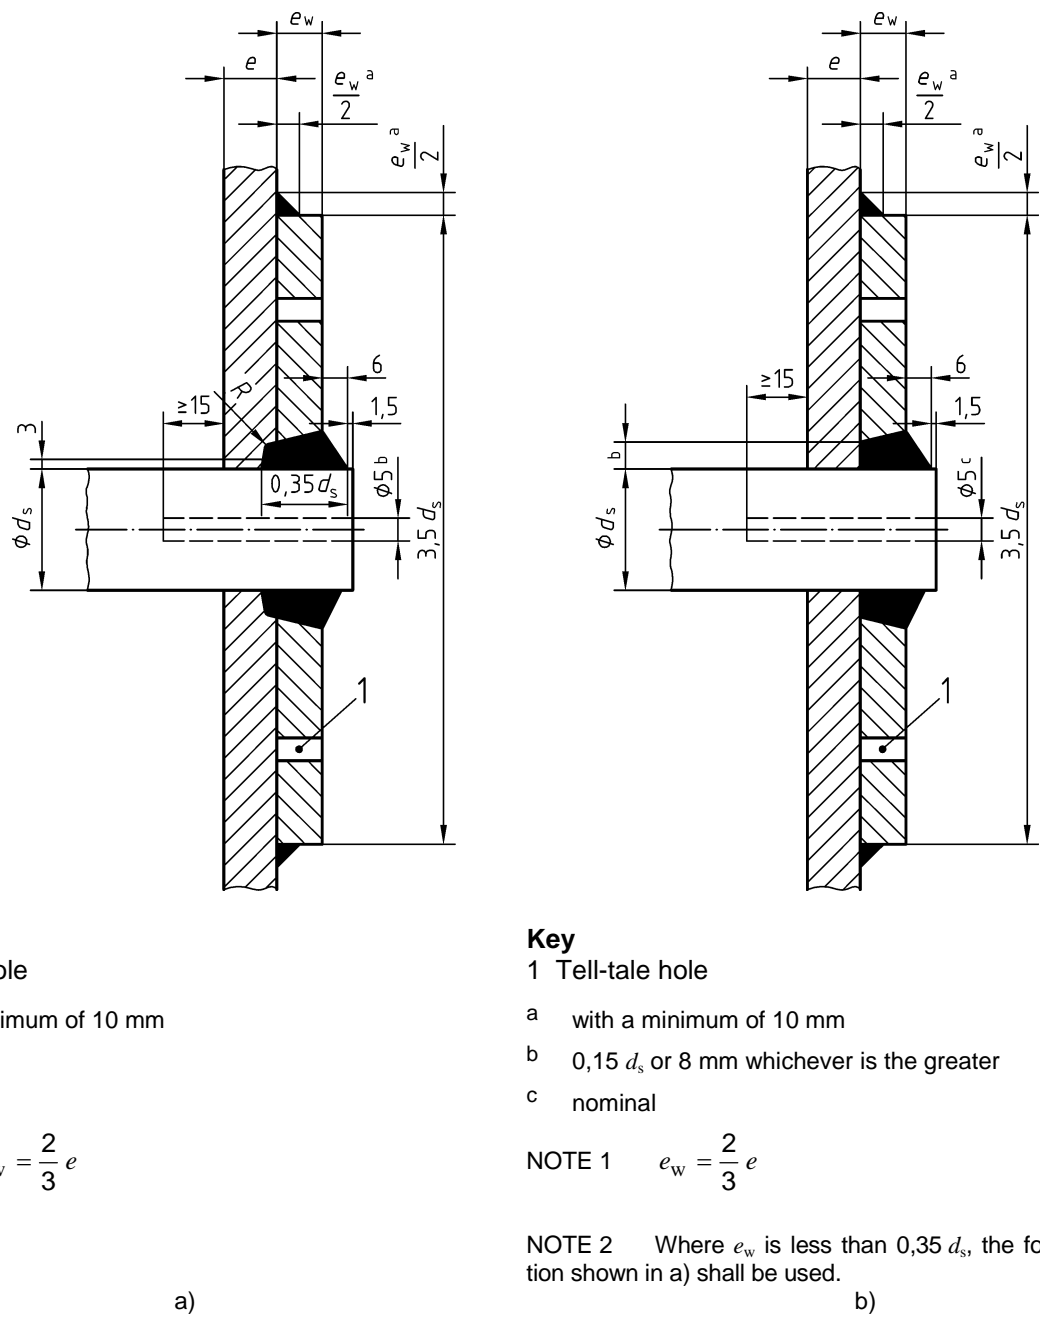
Permitted weld details of plain bar stay
